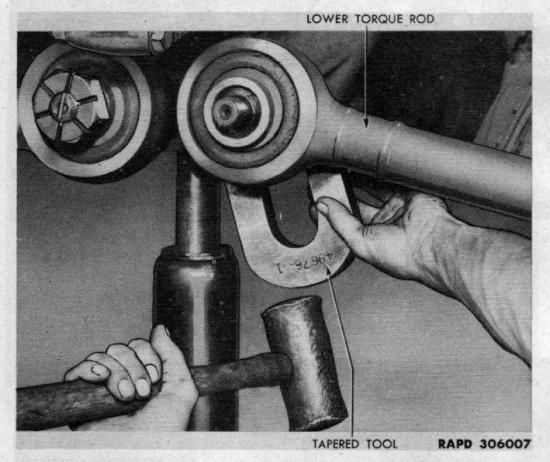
Removing Lower Torque Rod at Anchor End with Remover 41-R-2372-562
